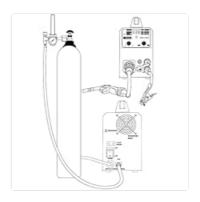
Diagram for MIG Gas welding setup, showing gas cylinder and connections.
